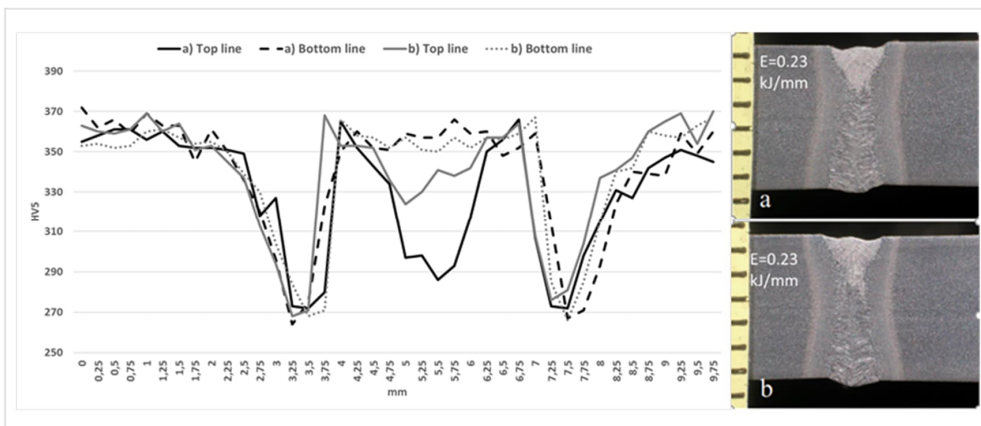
Hardness of laser-welded joints of S960 MC steel ( $t = 6$  mm).
